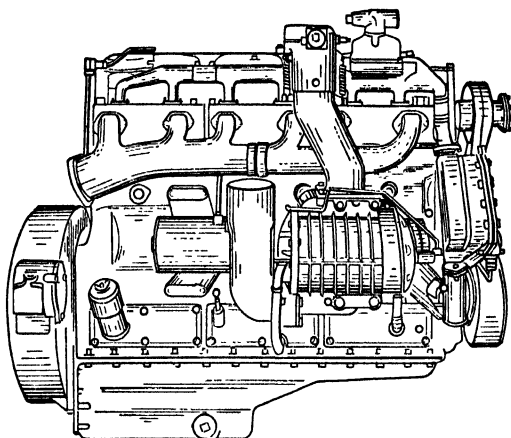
275-hp series NH5 Cummins engine with positive-displacement type compressor. (Courtesy of Cummins Engine Co., Inc.)
